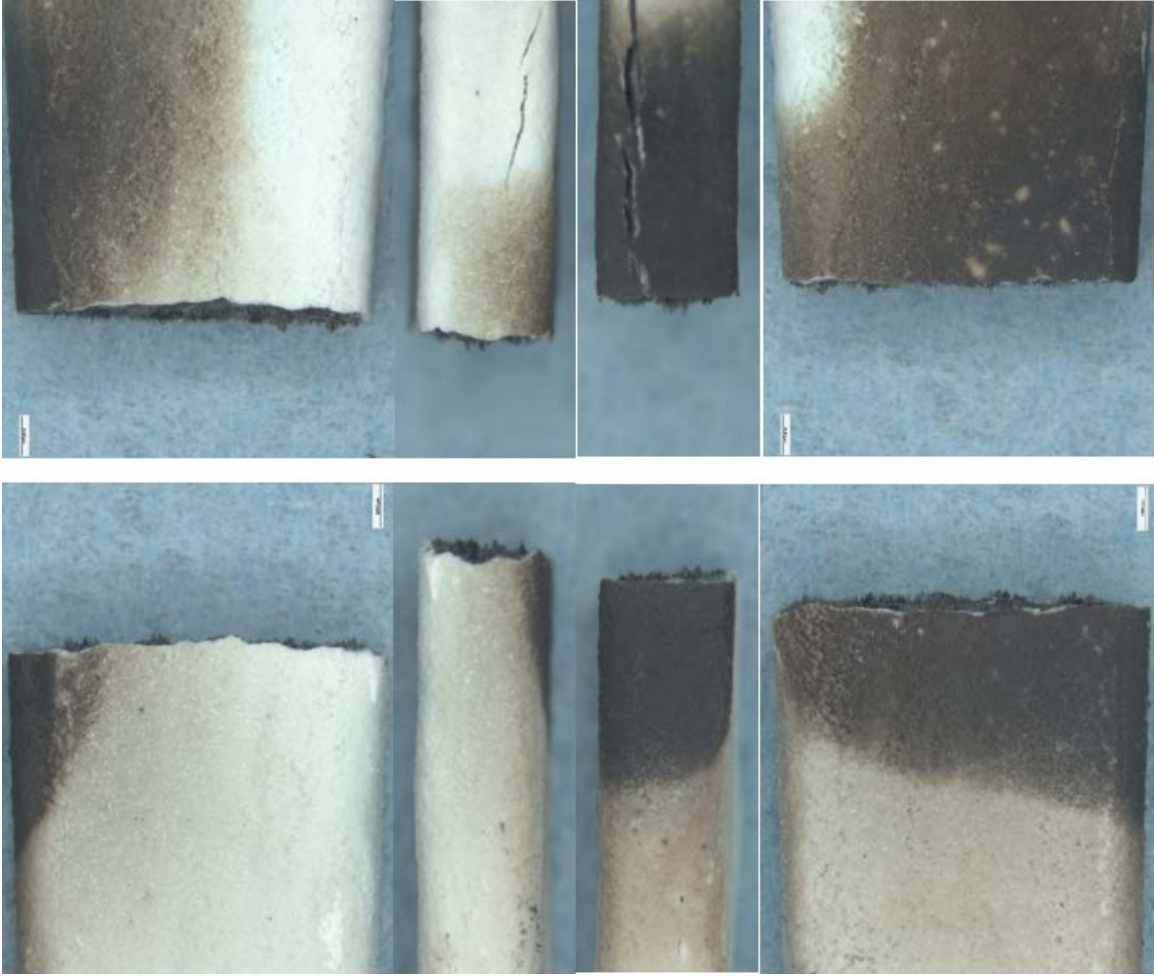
Fracture surfaces of specimen P15005-2, tested in fatigue at 1200°C in steam.
